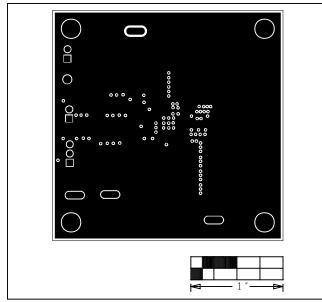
MAXM17503 EV Kit PCB Layout—PGND Layer 2
